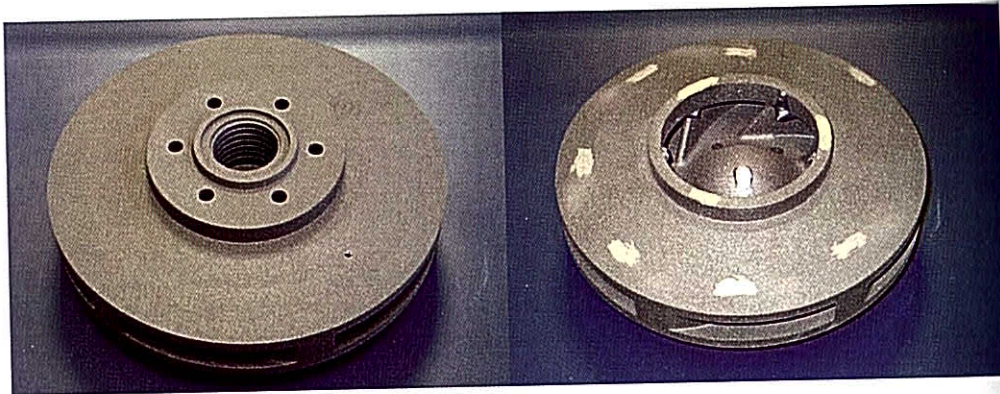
Closed impeller from SiSiC with 300 mm diameter [4].
